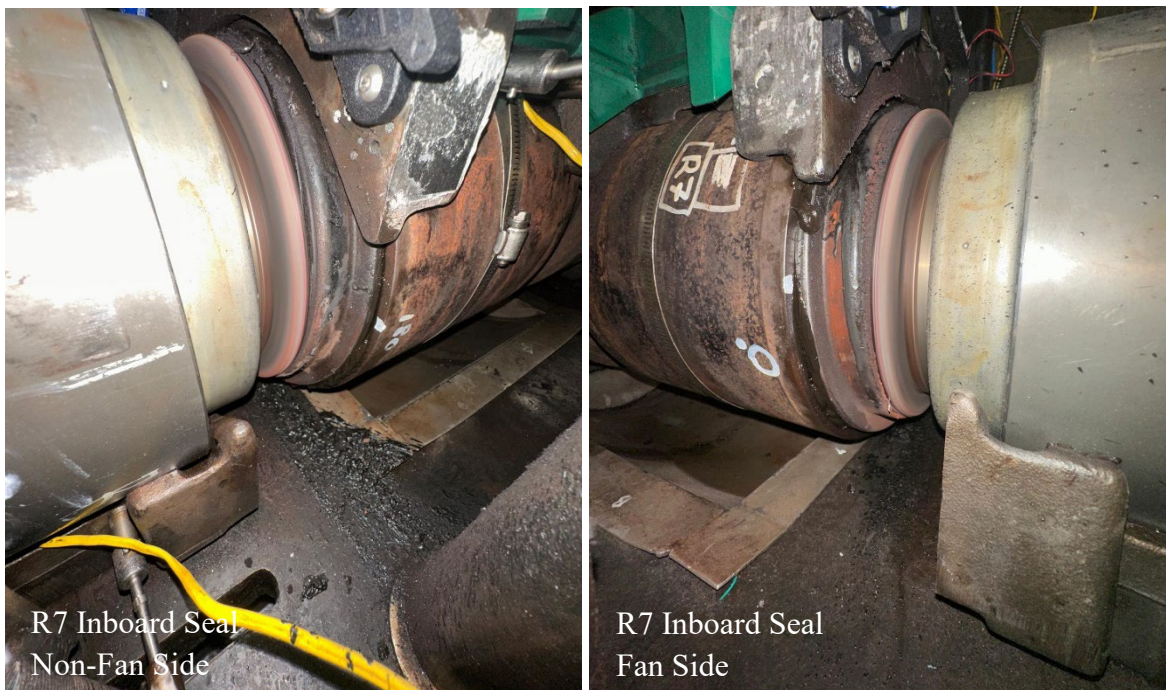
Picture of the inboard seal of bearing R7 that dislodged during testing. The face of the seal is no longer flush with the base of the seal that sits in the bearing cup
